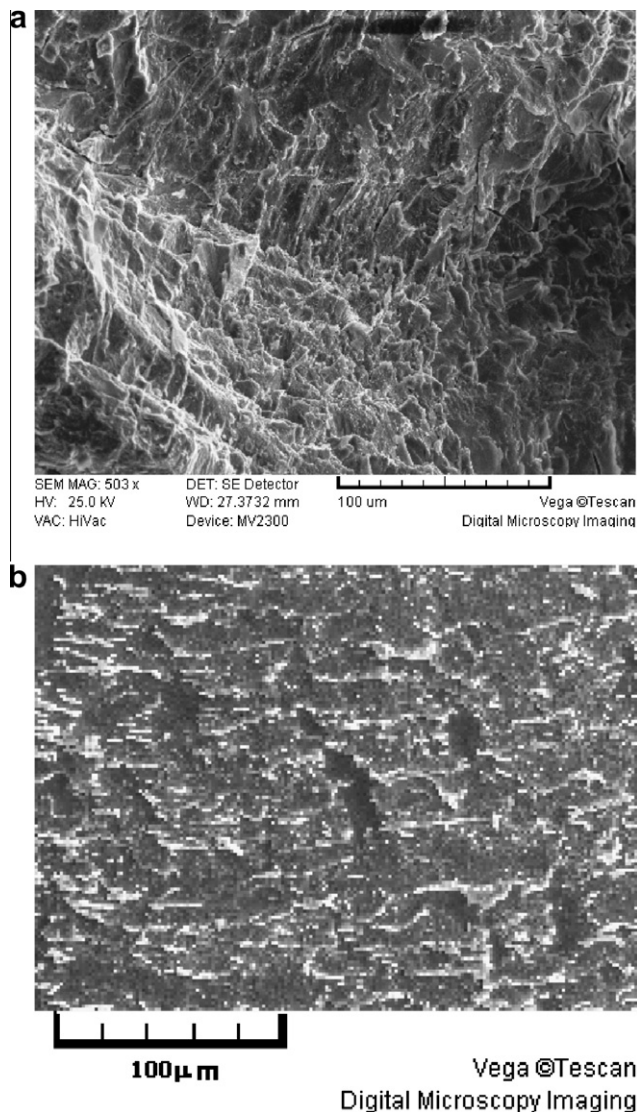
Fractured surfaces of lap joint of dissimilar CP-Ti/304 SS produced using tool rotation and advancing speeds of 1100 rpm and 50 mm/s, respectively, (a) CP-Ti side and (b) 304 SS side, both exhibiting of river pattern which reflects of a brittle transgranular fracture.
